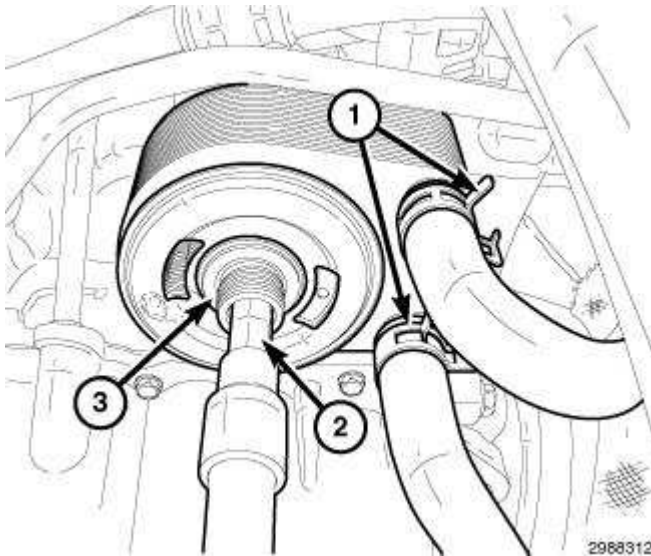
Clamps, Allen Wrench Socket & Oil Cooler Retaining Bolt
